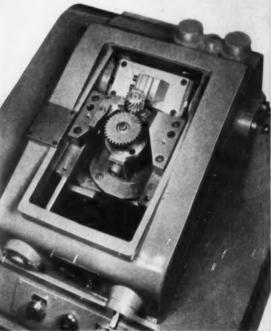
Close-up view of the machine shown in Fig. 1 with safety cover removed to show tooling
